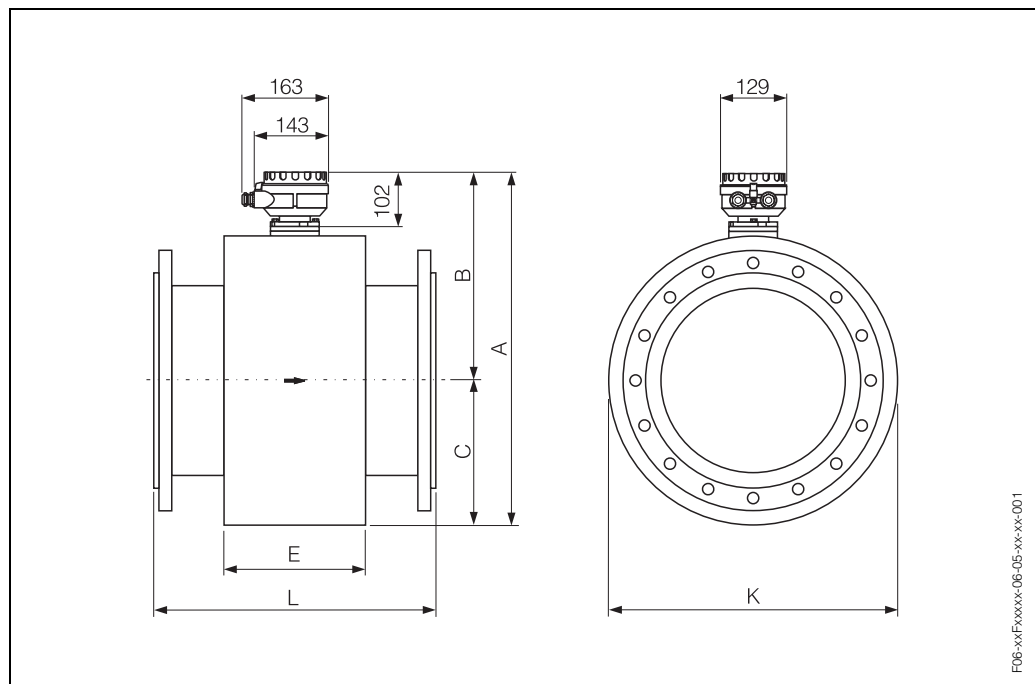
Dimensions Promag P / DN ≥ 350 (remote version)
